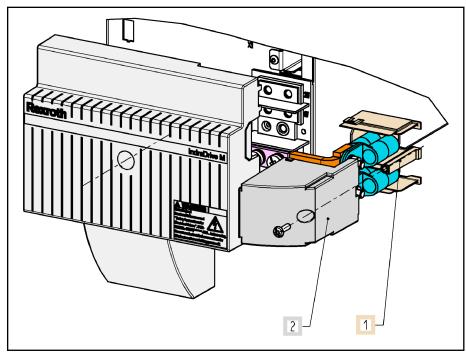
HAS05.1-004-NNR; mounting the touch guard
